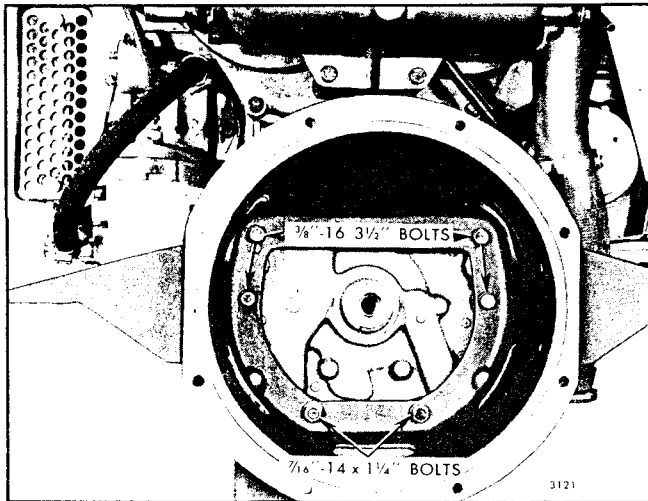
Location of Power Take-Off Adaptor to Engine Bolts
